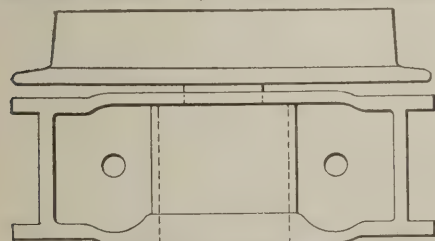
Original Arrangement of Bearing Housing and Wheel
